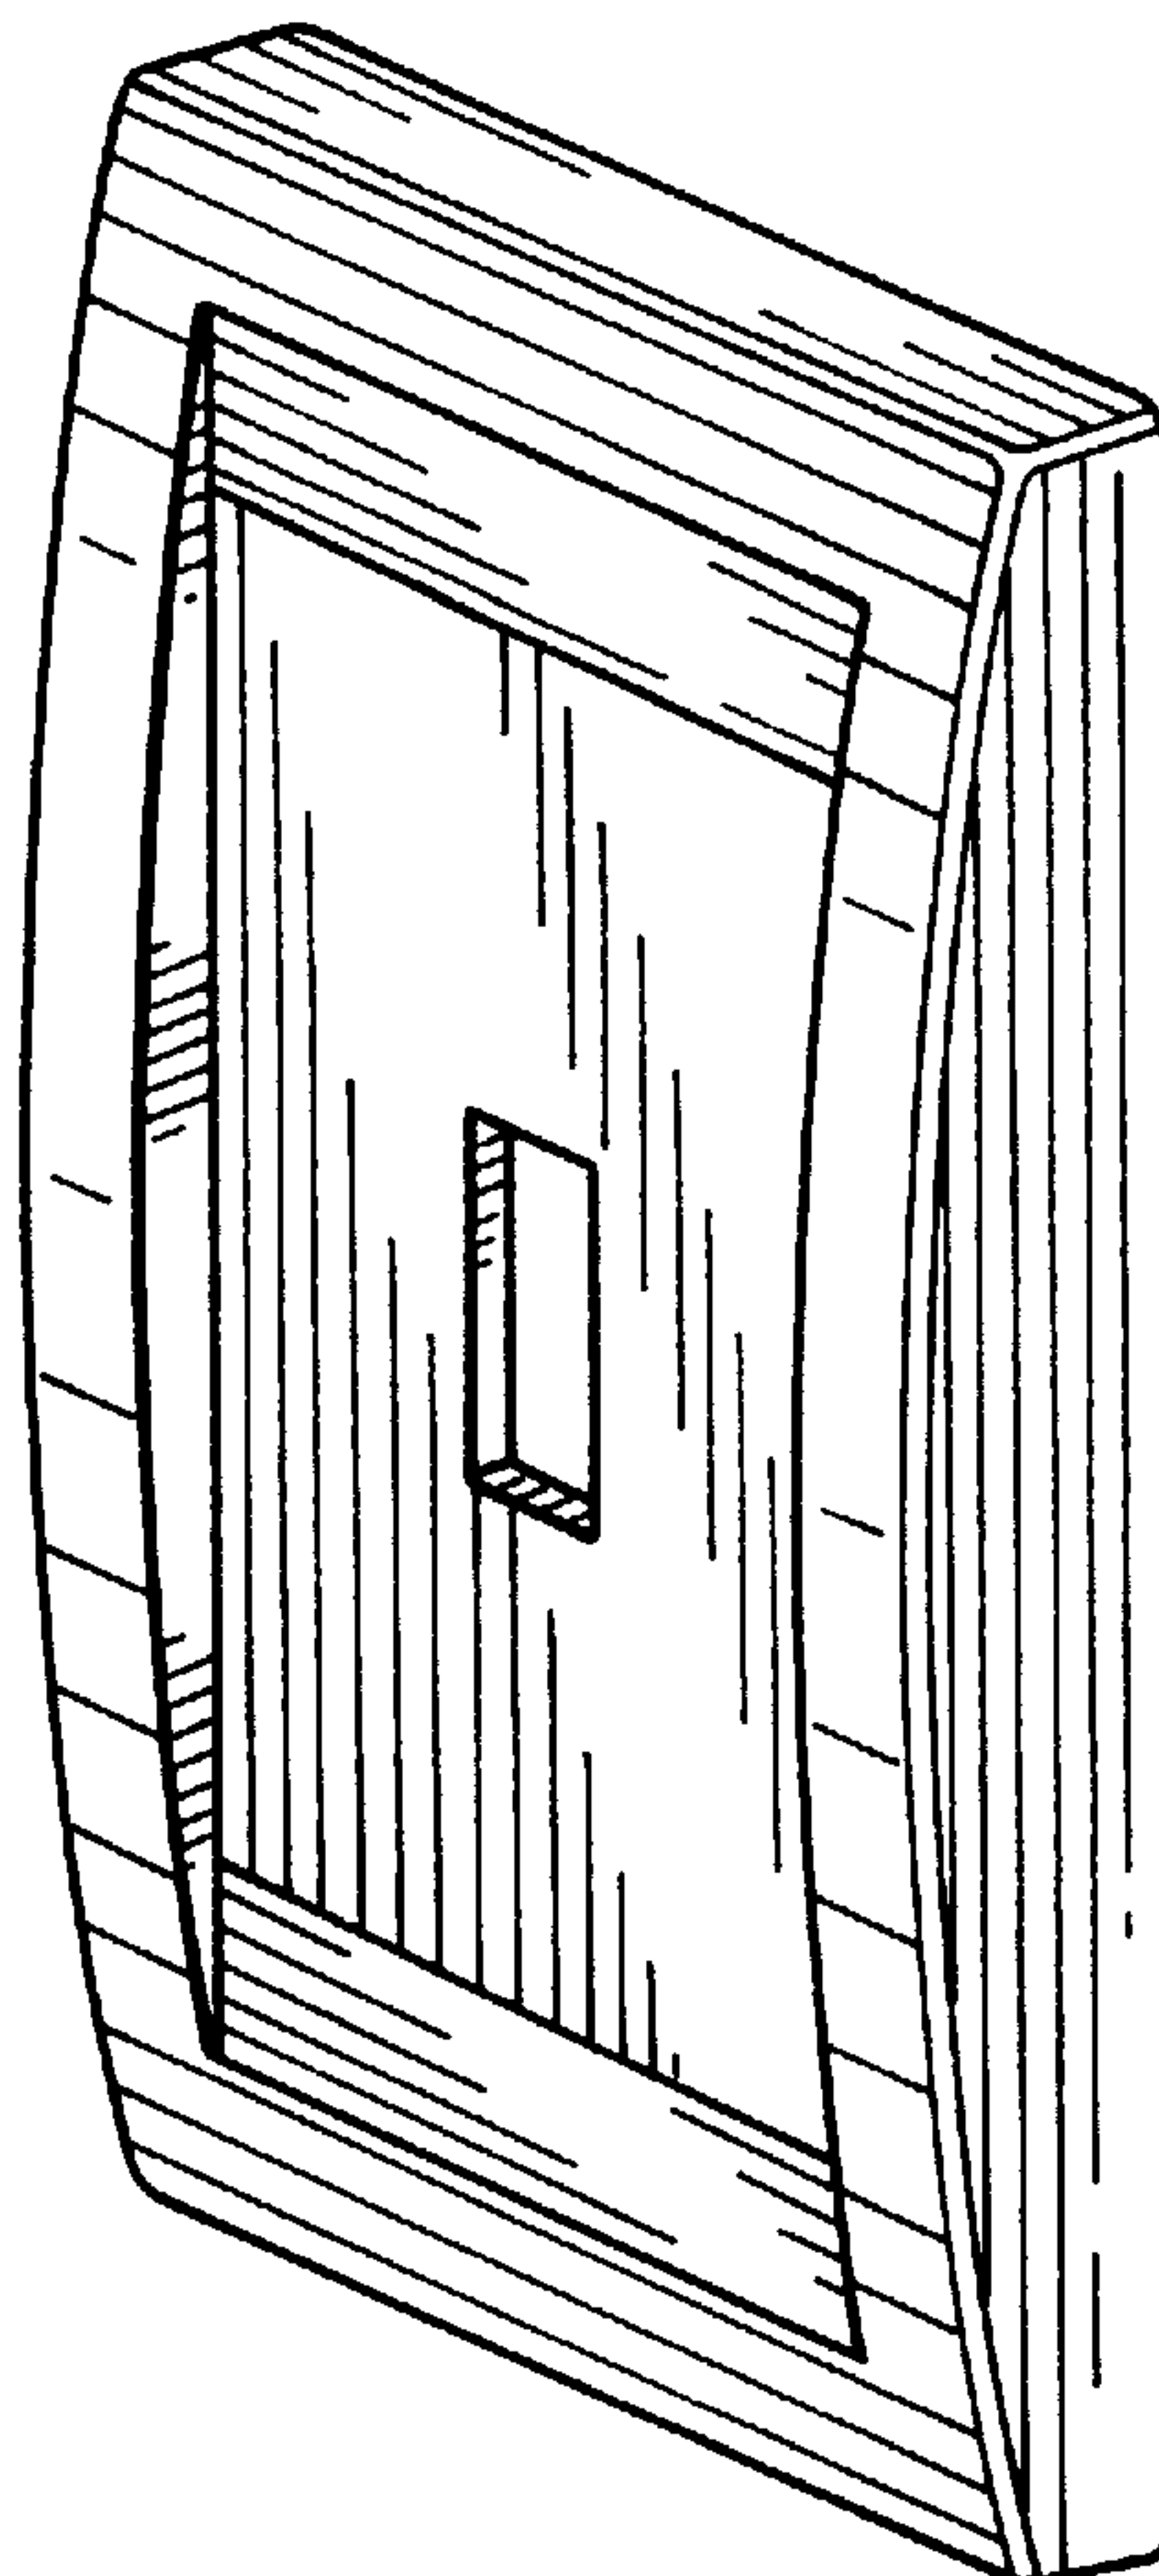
is a front perspective view of an alternate embodiment of the faceplate shown in FIG. 1;
